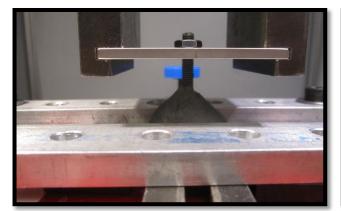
Compliant Pin Retention Force Test Setup – Header PC Board Specimen
